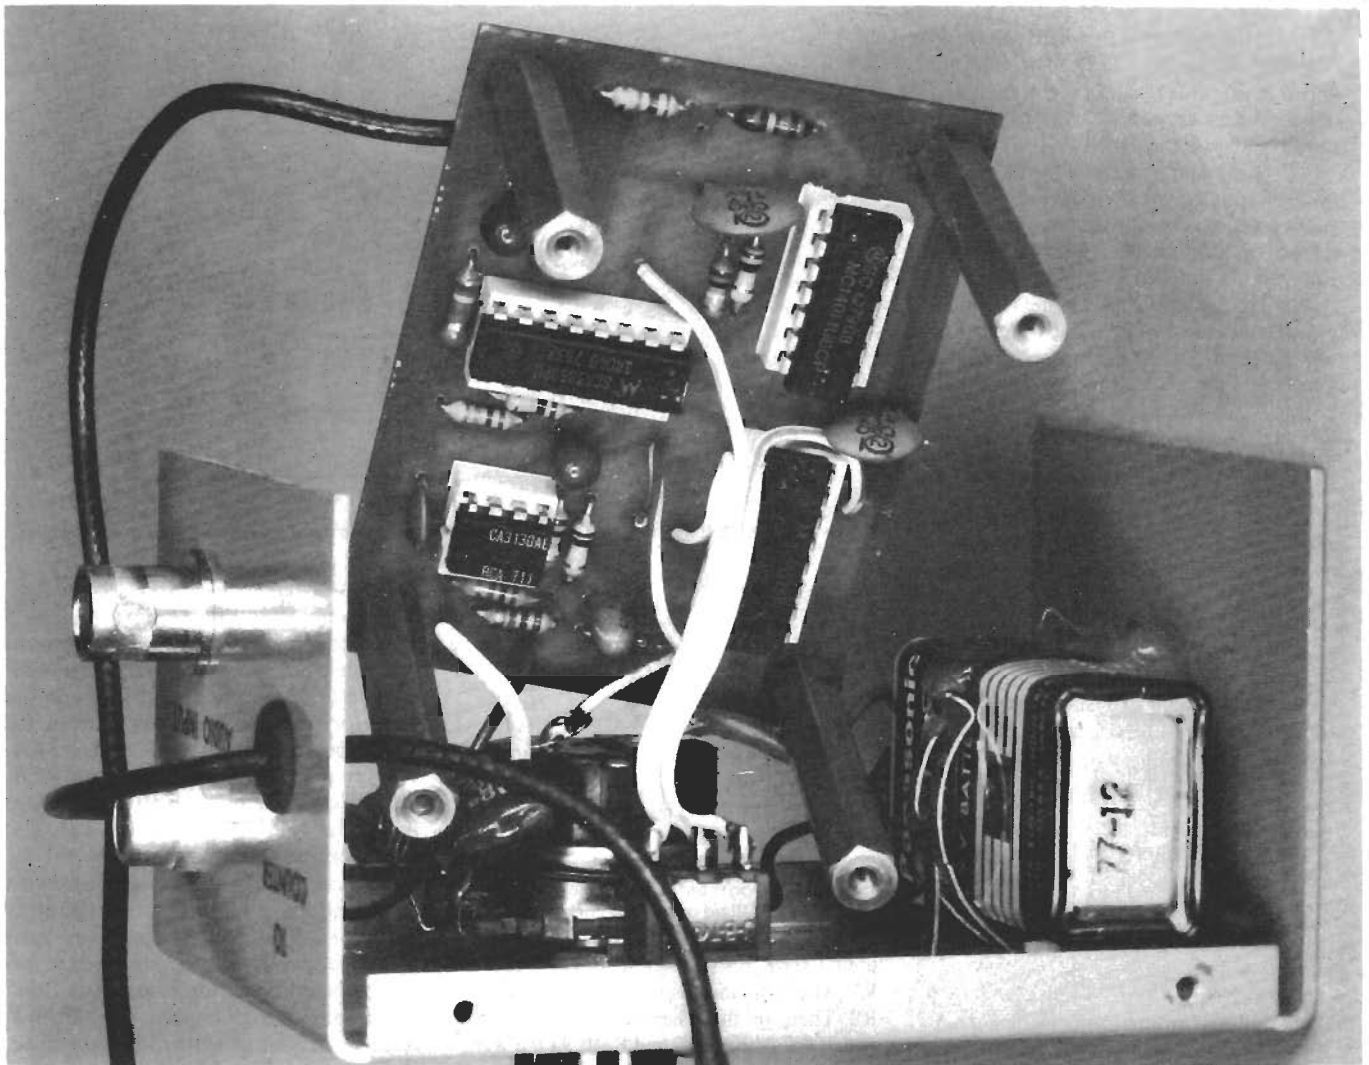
1½-INCH threaded spacers are used to attach PC board to top of case.
